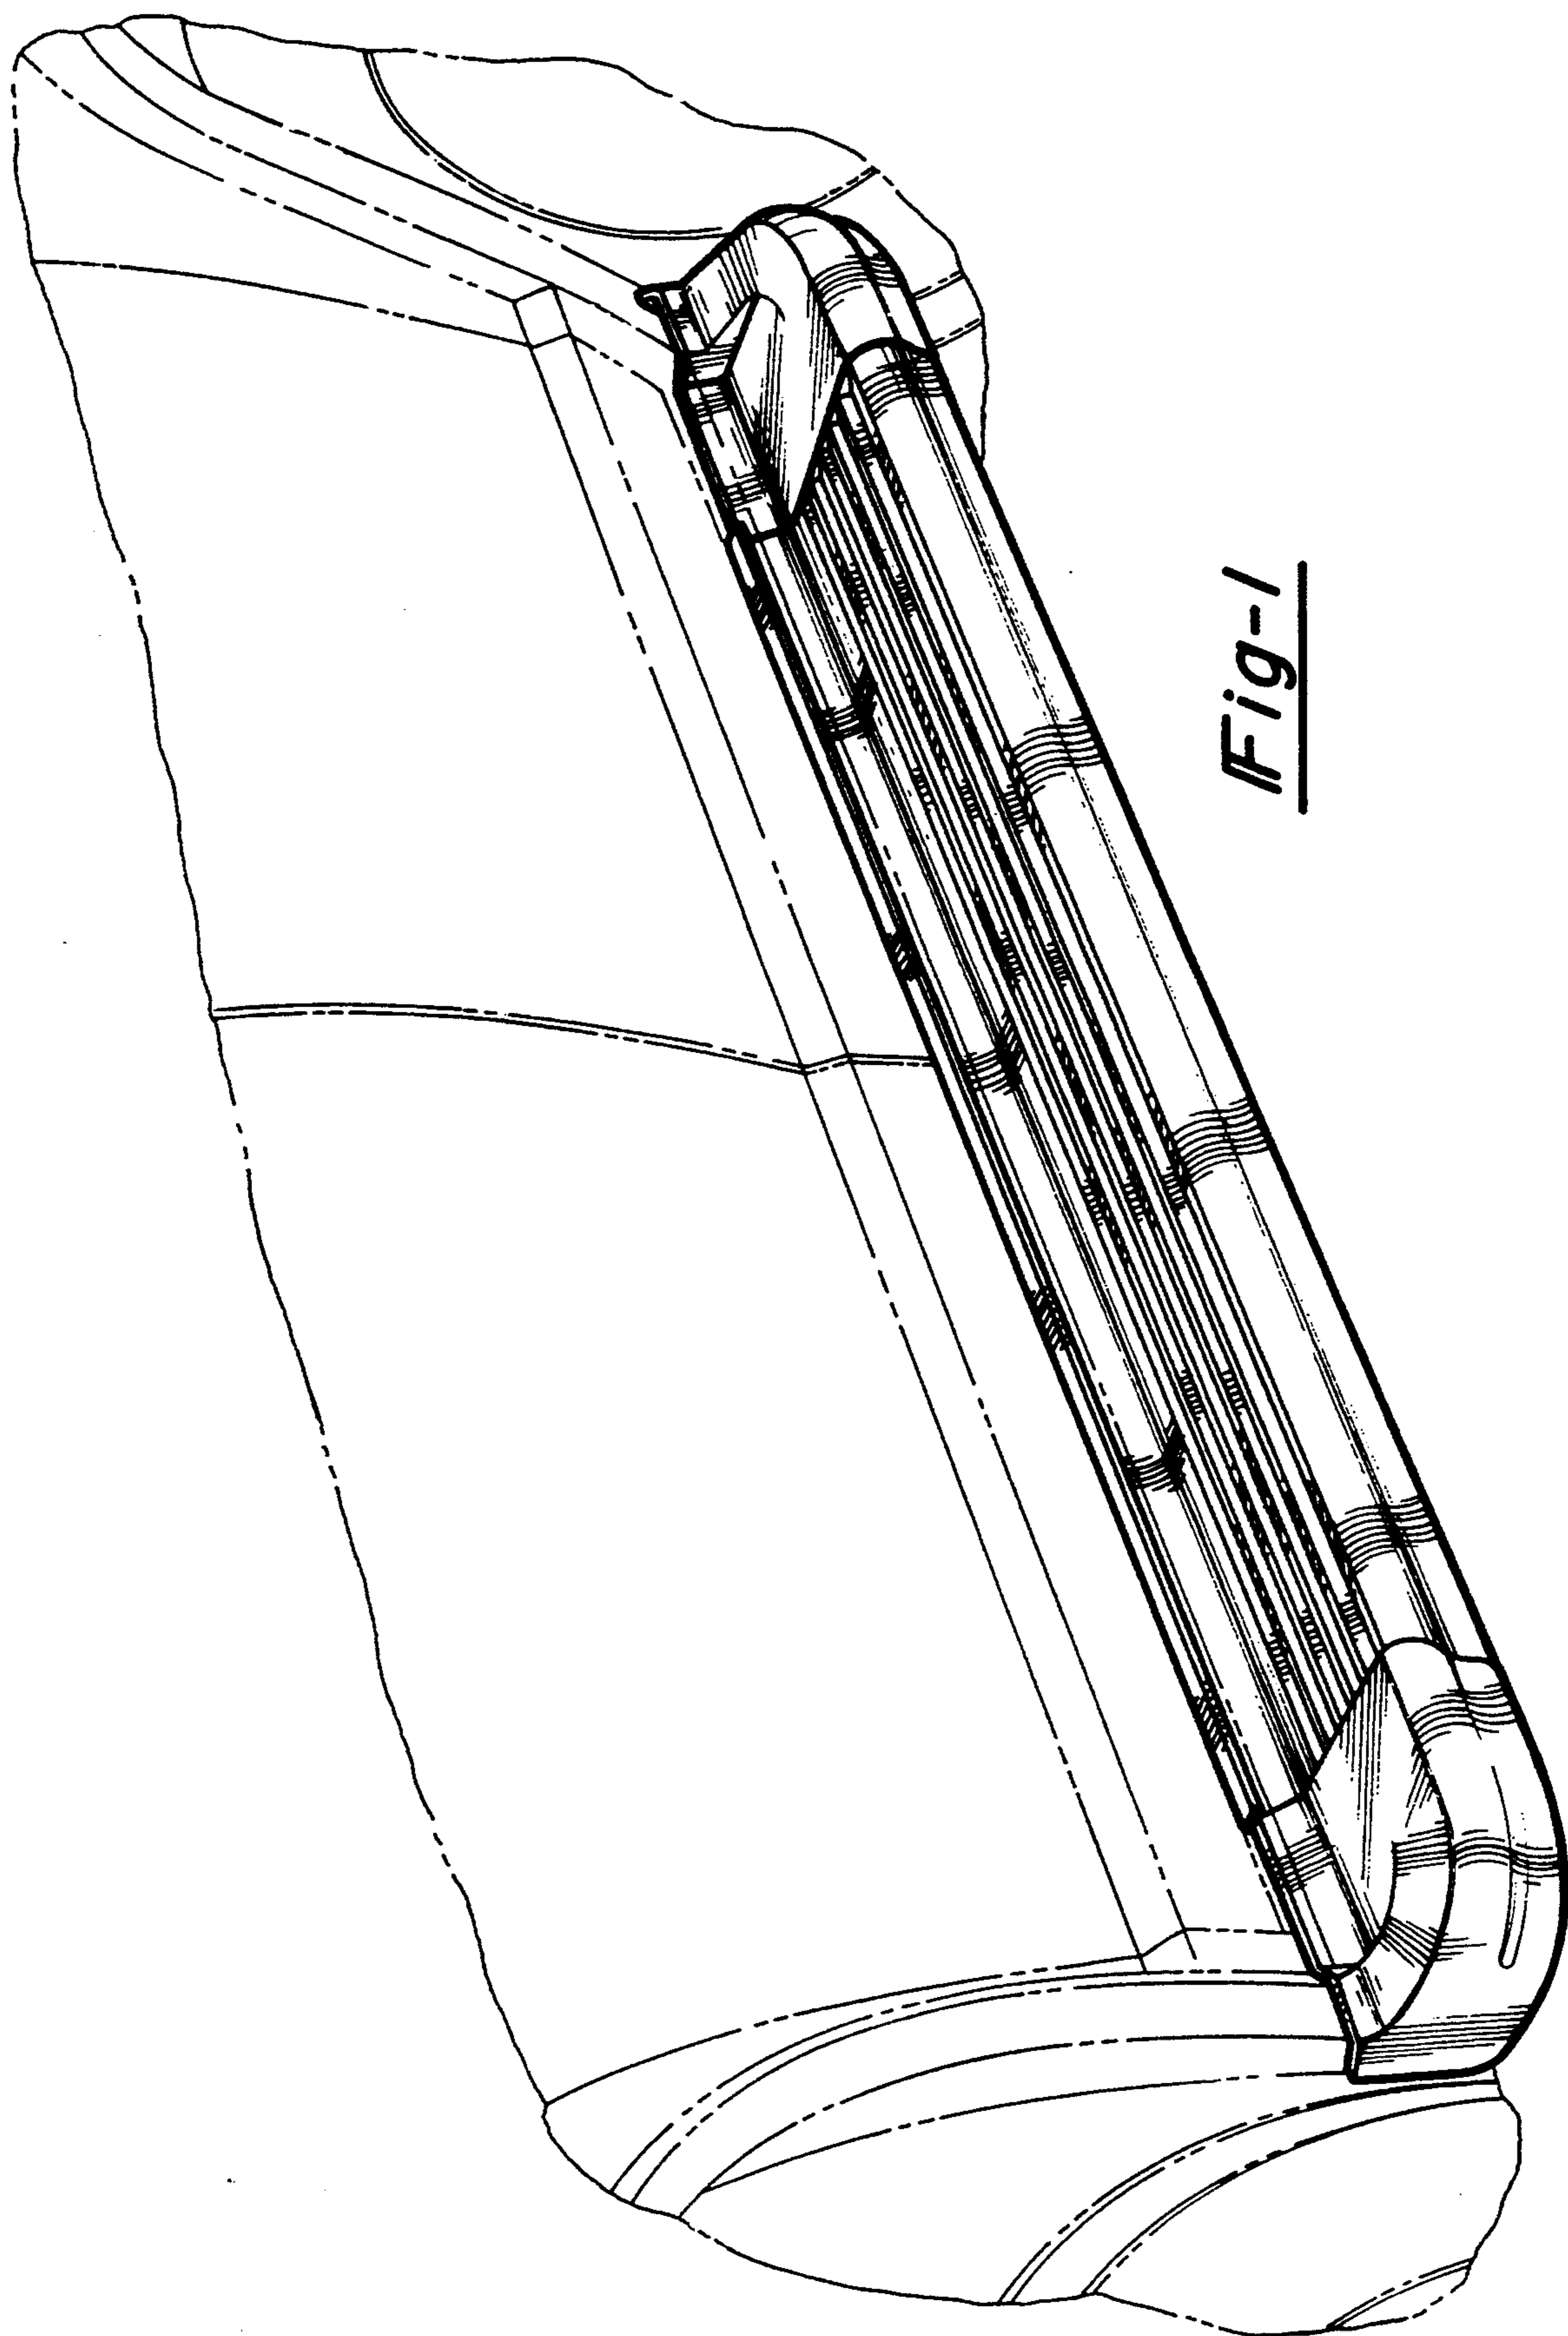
is a front and left perspective view of a vehicle running board embodying the design;
